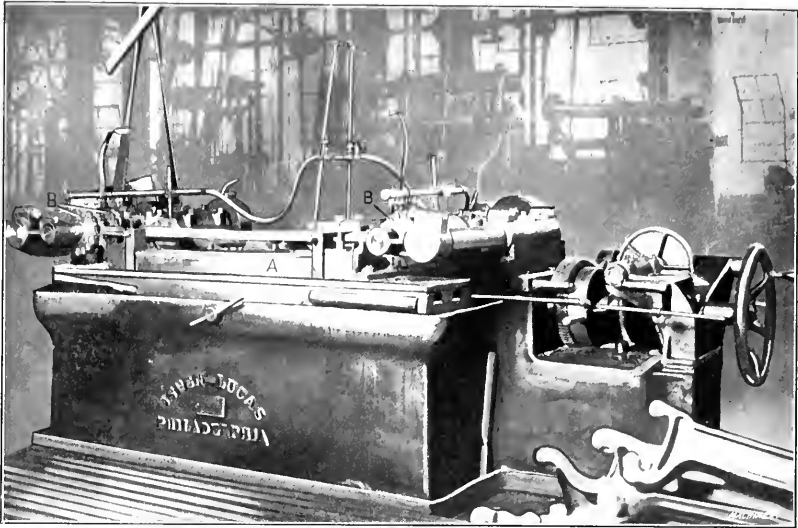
Milling the Axle Ends in a Special Horizontal Milling Machine
